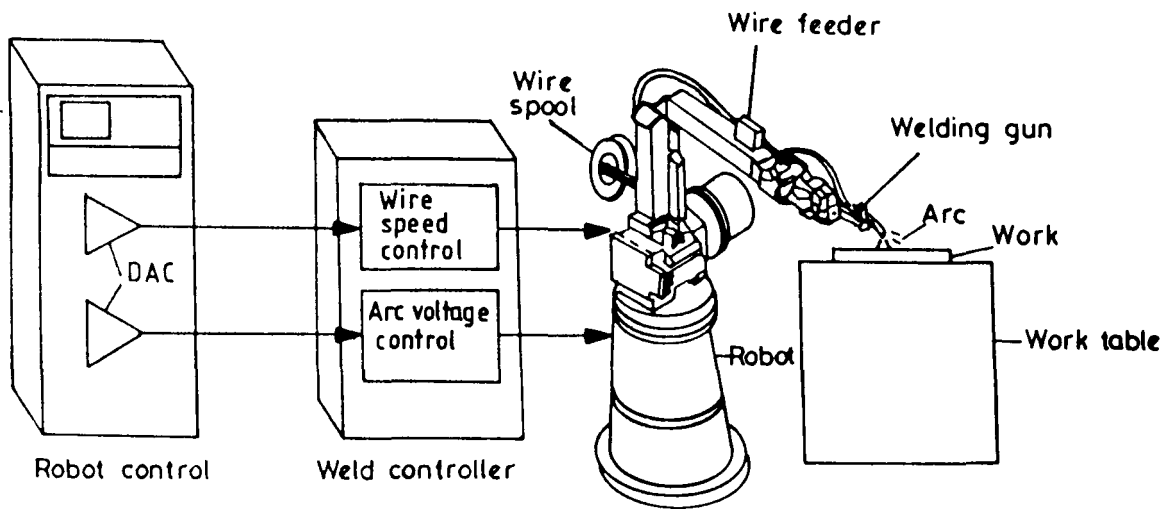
Essential elements of a Robotic MIG Welding System
